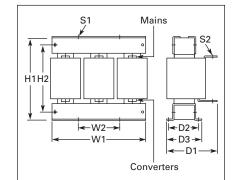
Line Reactor Dimensions for LCX9000 Drives Sizes larger than 61A
